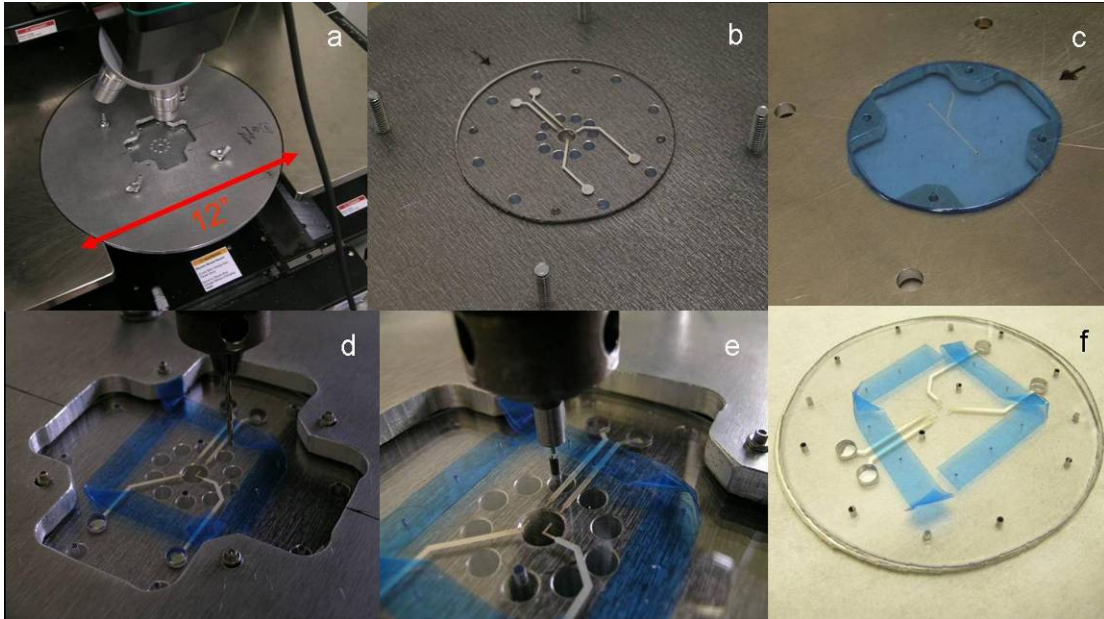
Device alignment and assembly steps in pictures. (a) Alignment jig shown on Cascade probe station, (b) PC wafer with PVDC and electrodes shown being loaded on bottom plate, (c) Mating PC wafer mounted on top plate, (d) Post-alignment holes are drilled for spring pins, (e) Spring pins being inserted, and (f) Final wafer ready for bonding.
